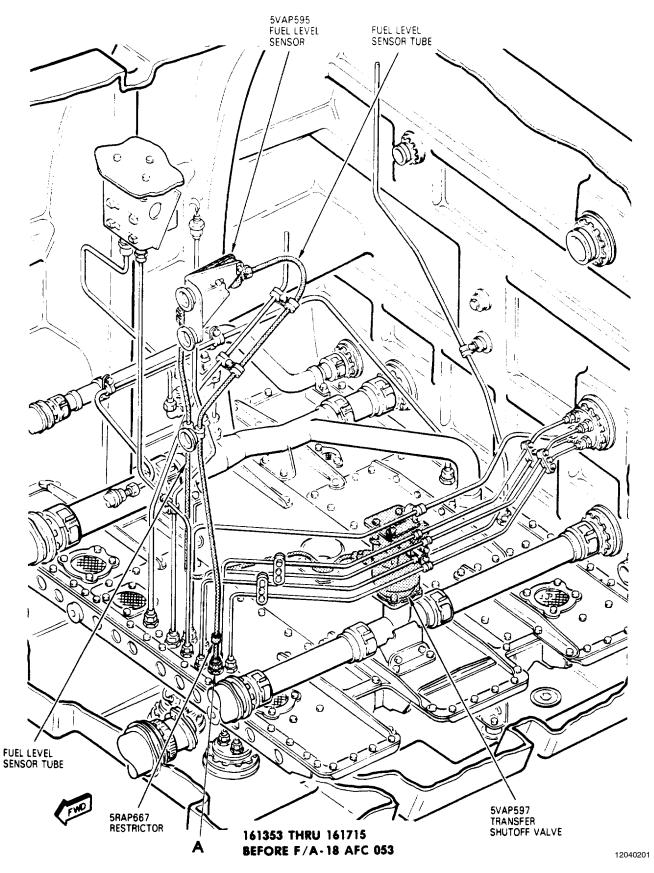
No. 2 Fuel Tank Cycle Test Troubleshooting Component Locator (Sheet 1 of 3)
